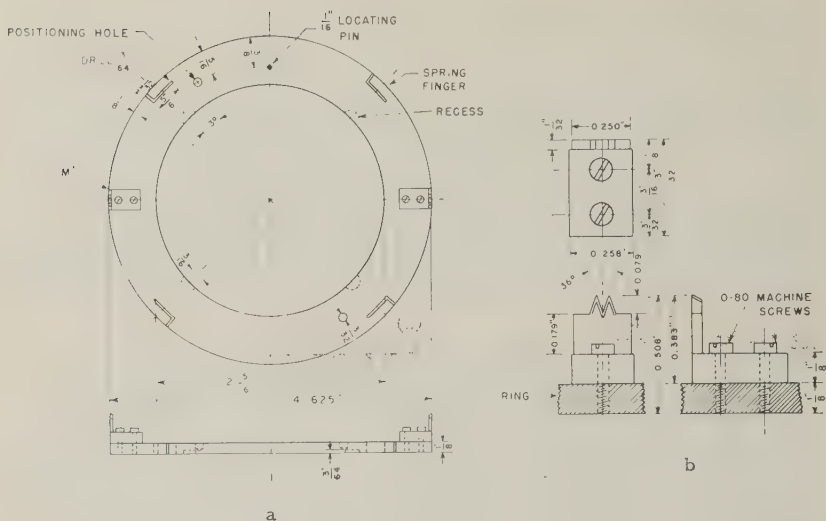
(a) Top and front view of ring with "M's" mounted in position. Material used for ring: 24 ST aluminum alloy.
